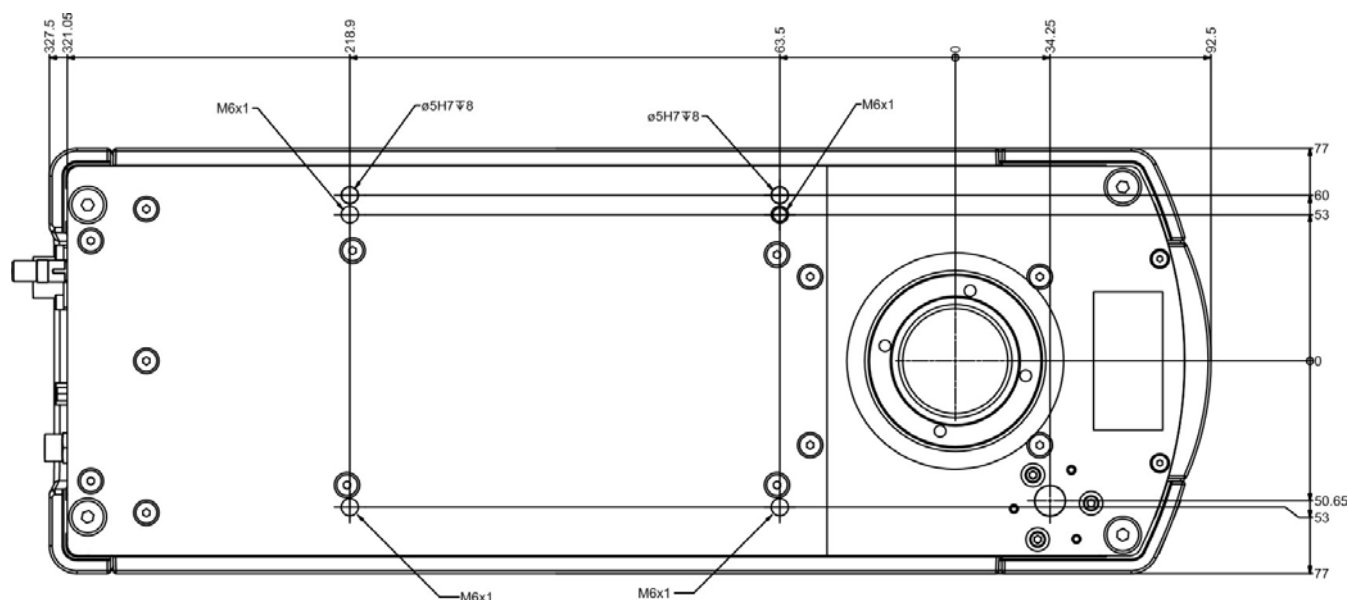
Measures, distance threaded holes and fixing pins drivers.
